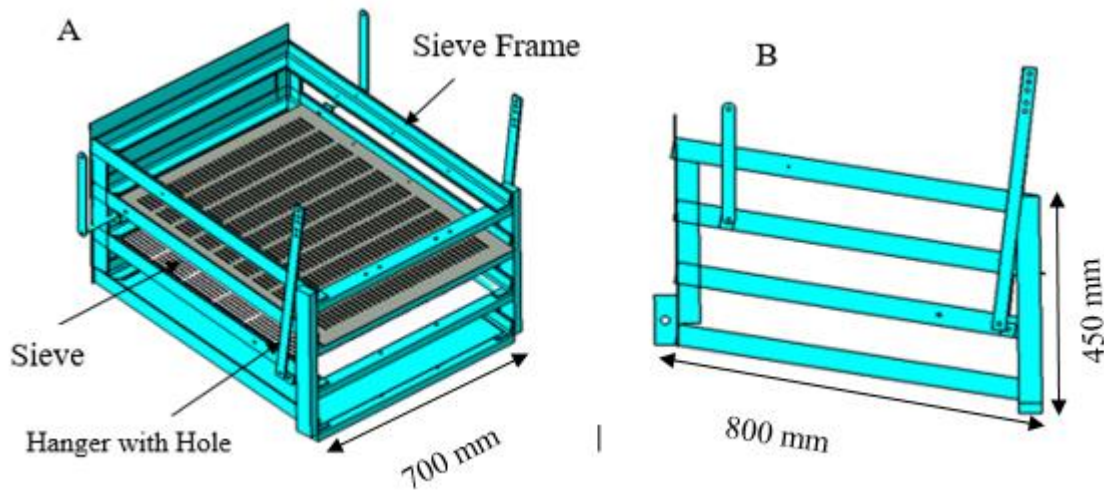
Sieve frame with a sieve; A) isometric view and B) side view
